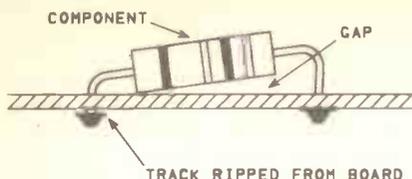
A gap between component and p.c.b. risks tearing track from the board.
